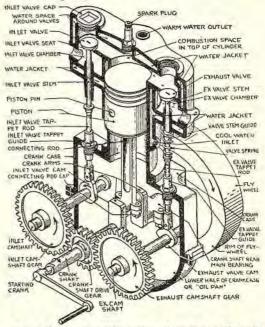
Parts of a gasoline engine. Cylinder is a "T-head" type with inlet valves on one side and exhaust valves on the other. The inlet valves do not necessarily have to be on the right side. Some cars, which formerly used the T-head type of engine (for instance, an early-model Locomobile T-head six-cylinder engine), had the inlet valves on the left and the exhaust valves on the right; whereas an early model Pierce-Arrow T-head six-cylinder engine was the reverse. The T-head engine is now seldom used; the L-head type, with the valves all on one side, and the I-head type (see p. 47) are used most.
